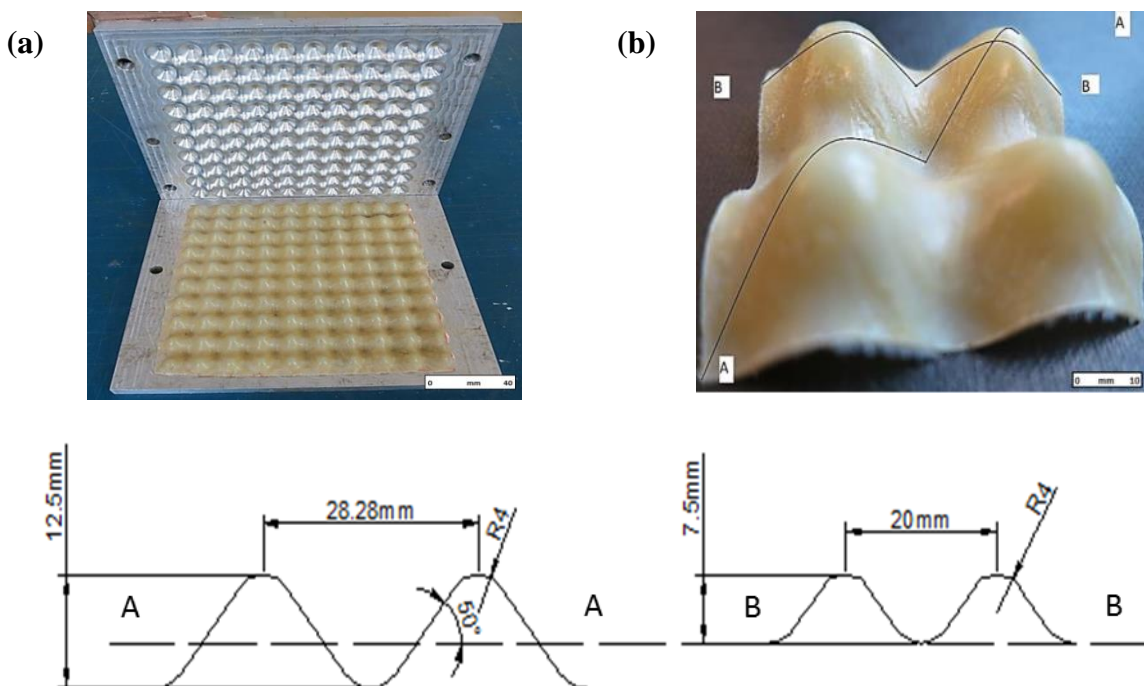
(a) The mould (b) Geometry and dimensions of the core.
